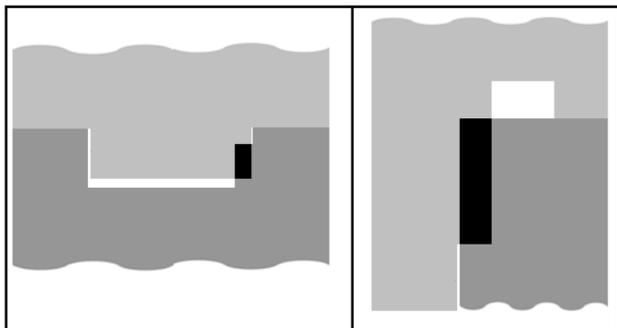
Spin weld joint designs that can hide flash while providing a strong weld.
